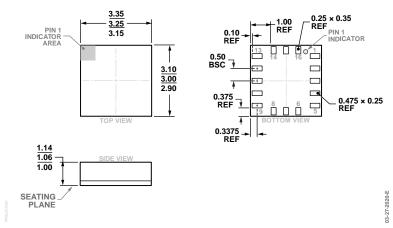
16-Terminal Land Grid Array [LGA] (CC-16-4) Dimensions shown in millimeters
